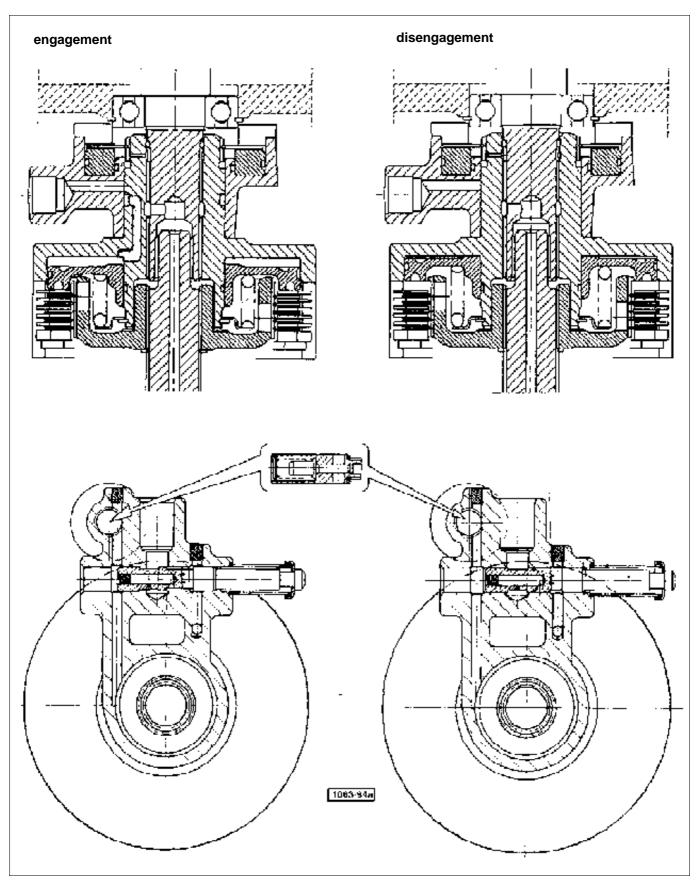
Rear P.T.O. control for machines with mechanically operated clutch.
